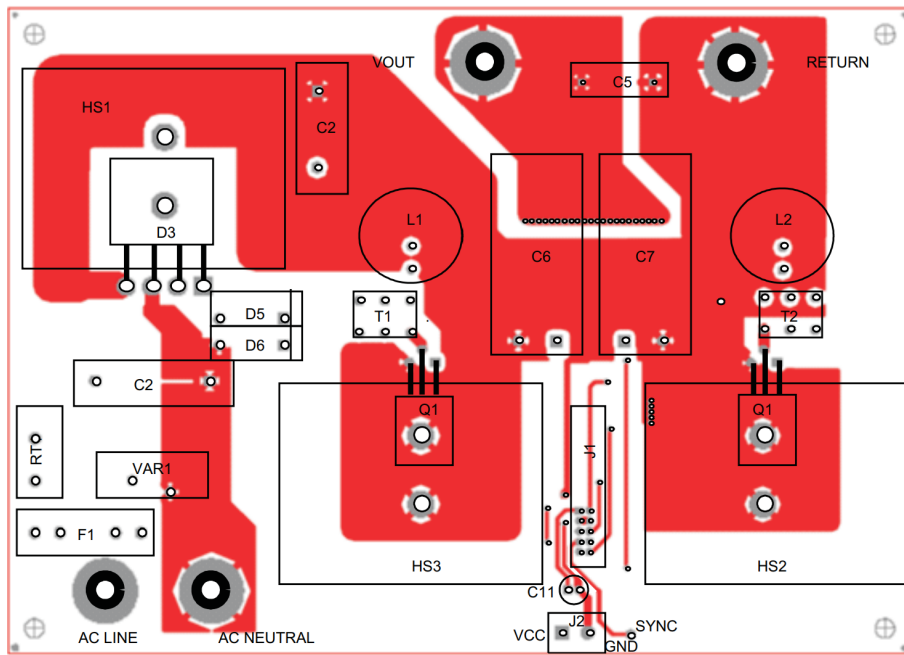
Motherboard of UCC28070EVM top assembly [28]. Reprinted with permission.
